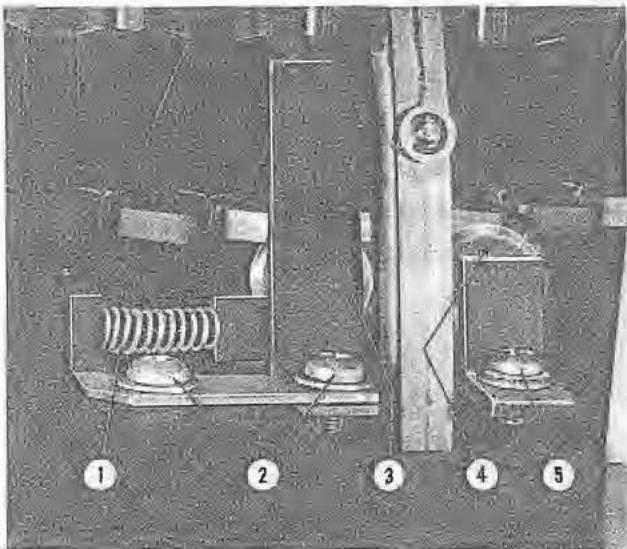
ROLLER GUIDE ADJUSTMENT, 2410, 2404 LIFT ARMS
